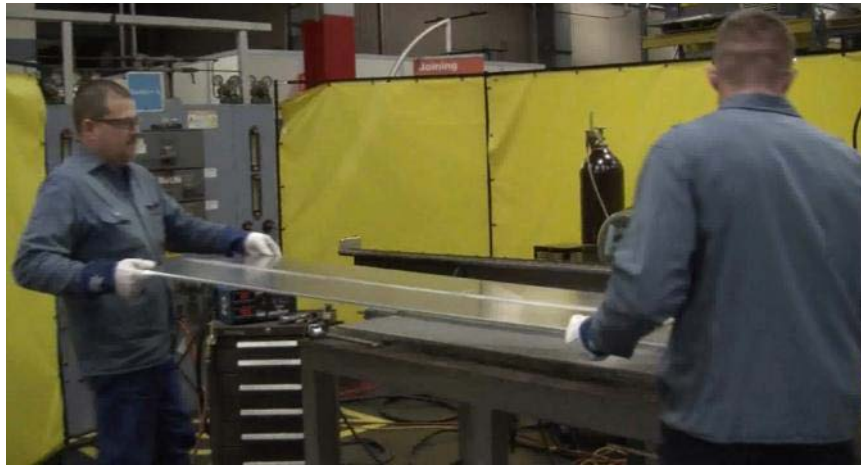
A – Plate placement of the tack welded plate assembly onto the welding table over the recessed welding backing bar (not seen) and spacer plates (Figure 8).
